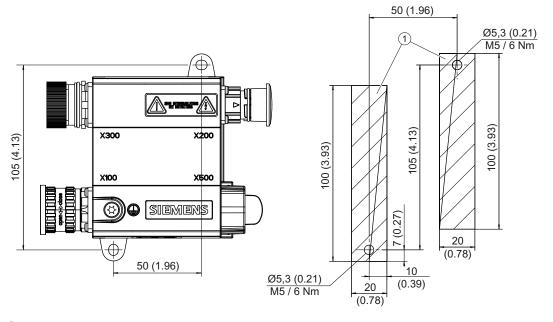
Dimension drawing of the Sensor Module External SME120, all data in mm and (inches)
